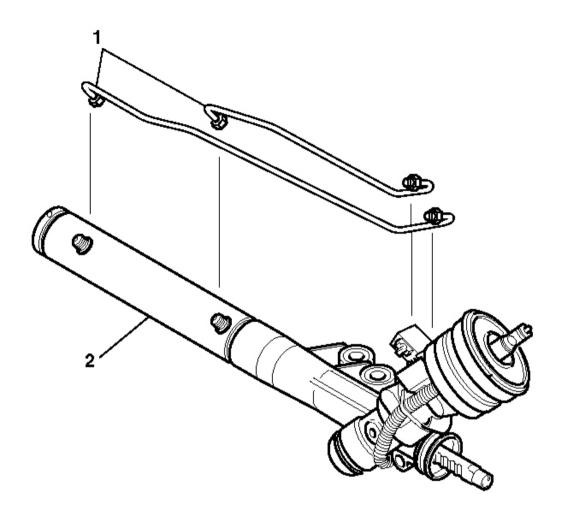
Cylinder Line Assemblies, Rack & Pinion Gear Assembly Courtesy of GENERAL MOTORS CORP.
